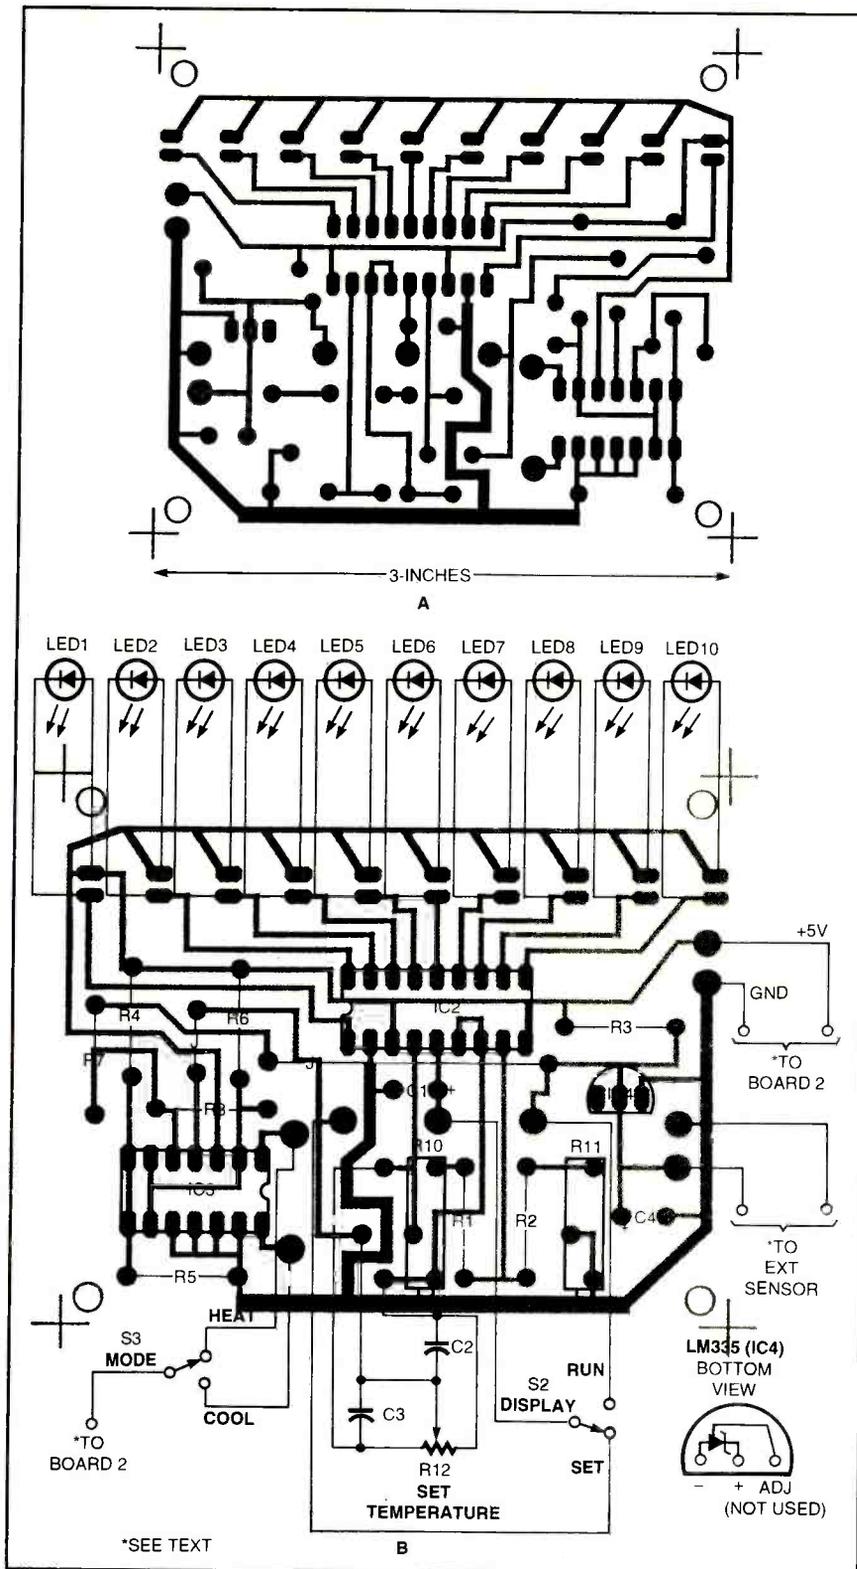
The prototype of the ECC was assembled on a pair of printed-circuit boards (designated board 1 and board 2). A template for board 1 is shown in A, while its parts-placement diagram is shown in B. It is recommended that IC sockets be provided for IC2 and IC3.
